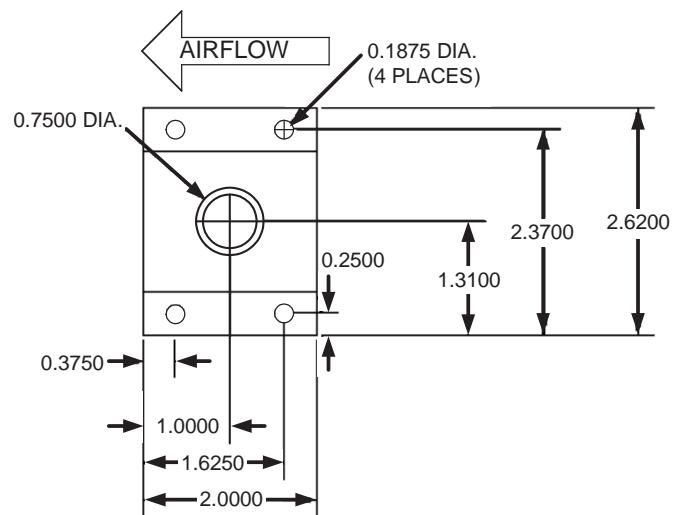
GF-1200-A Sensor Probe Mechanical Detail
